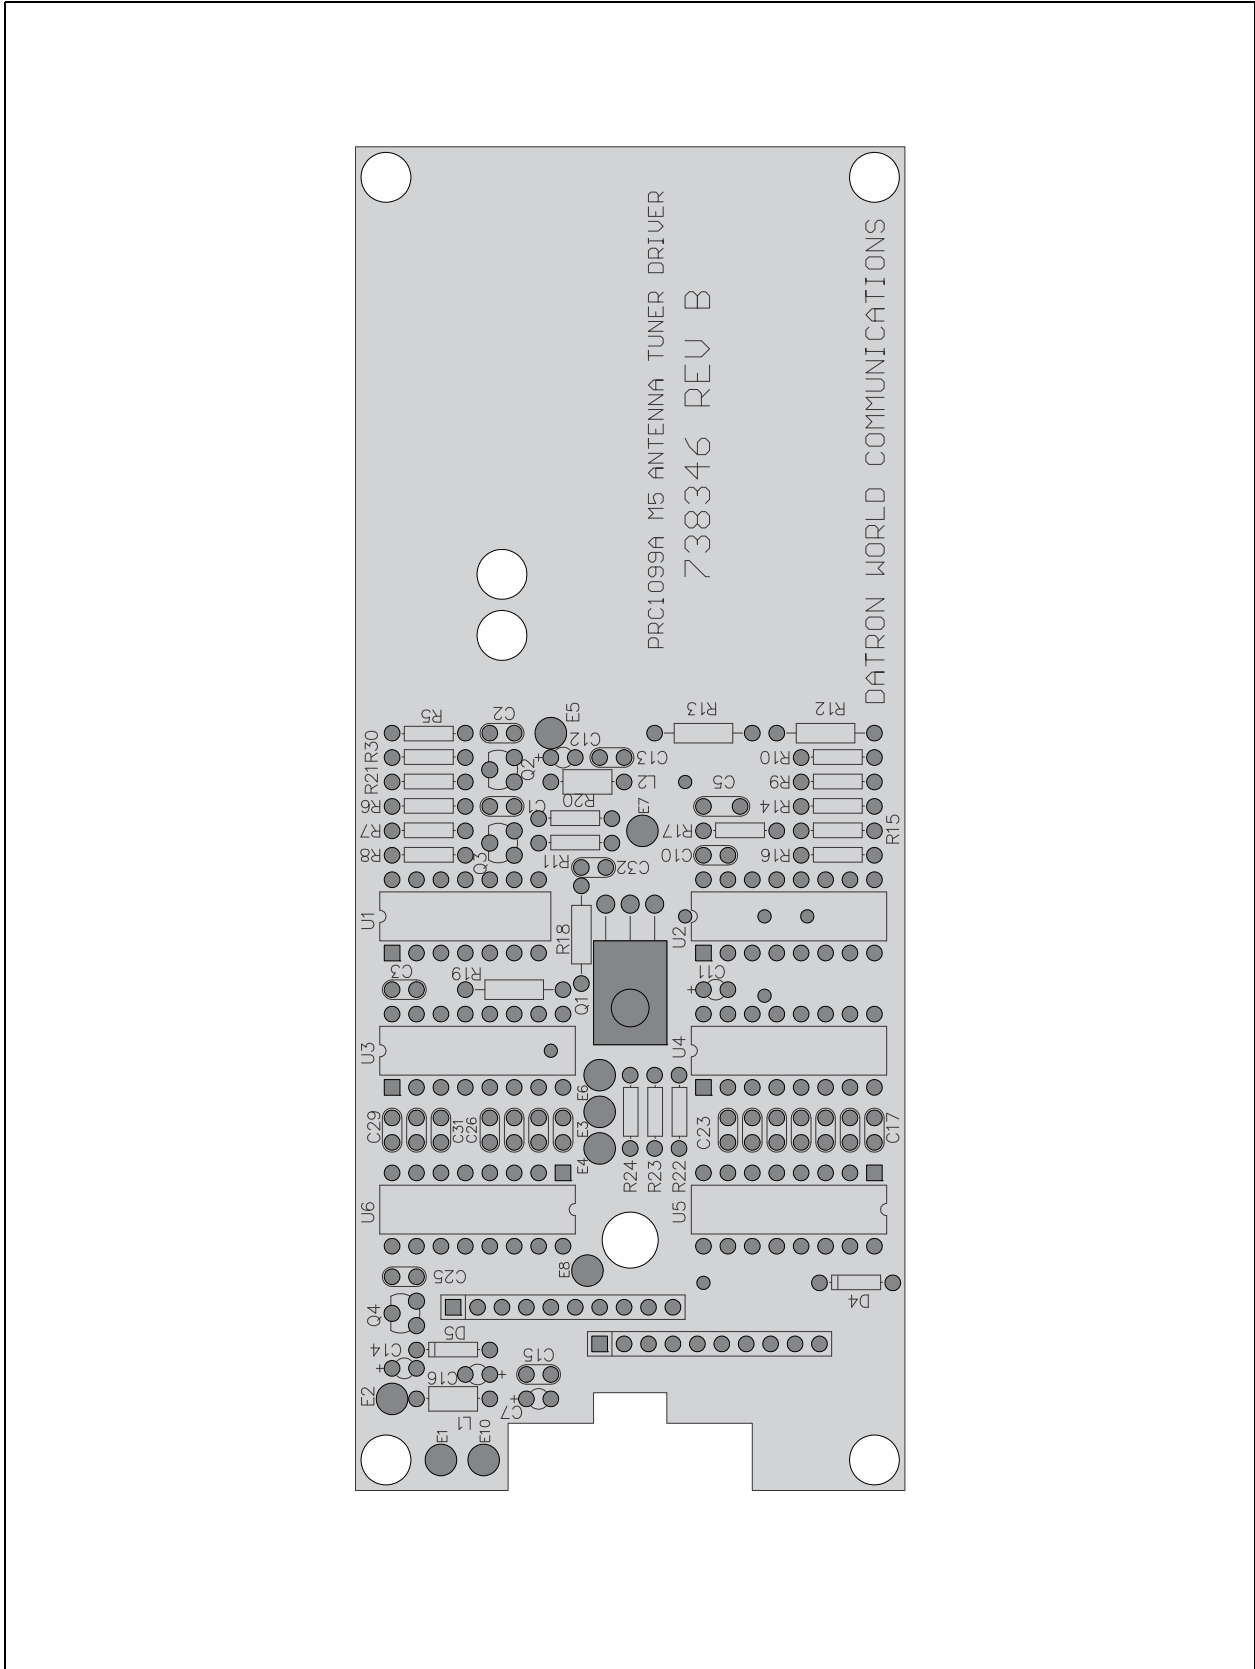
Antenna Tuner Driver Board Component Locations (738346 Rev. B)
